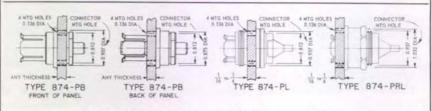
Mounting dimensions for Type 874 Panel Connectors.
